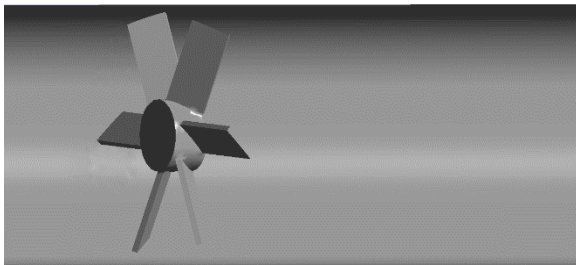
Cutaway drawing of the pipe with the compact inline swirler separator
